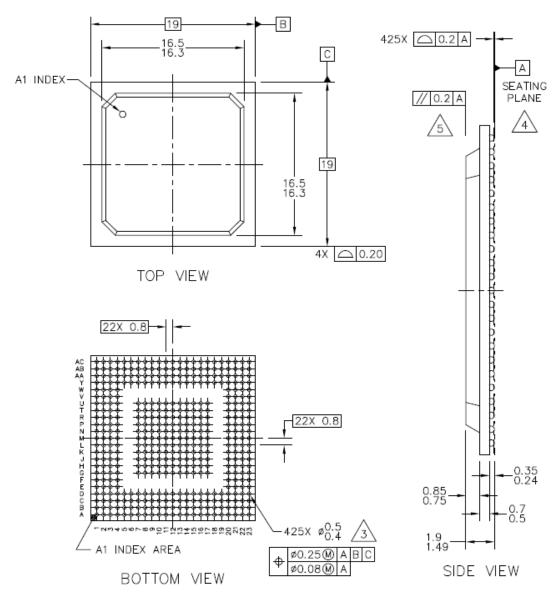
Mechanical Dimensions of P1010 WB-TePBGA package
